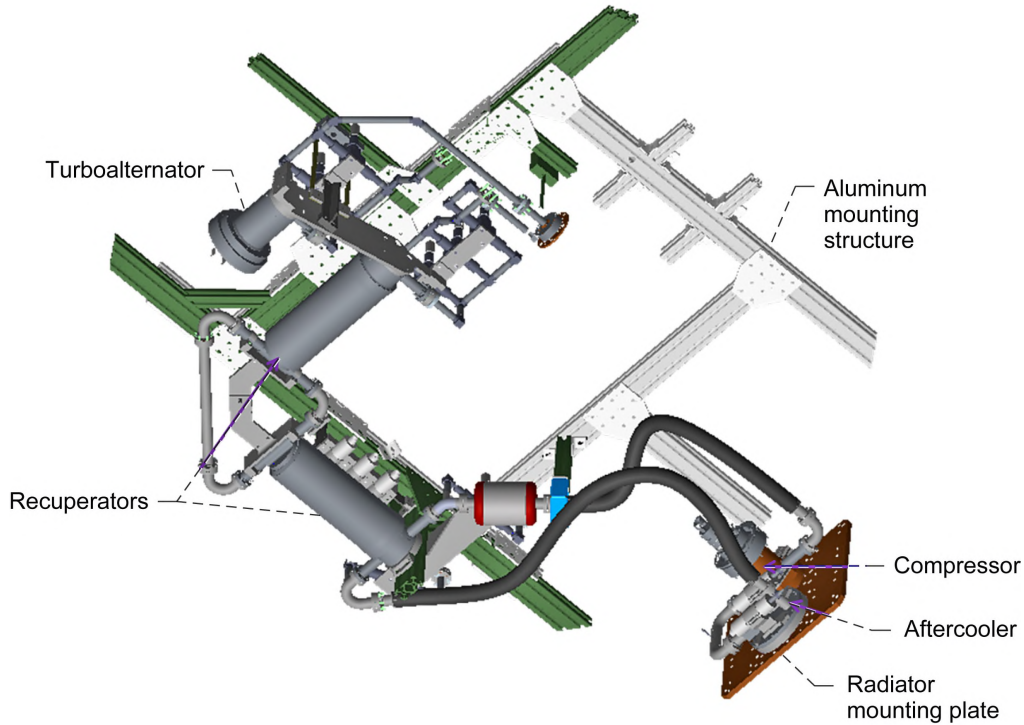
Three-dimensional model of the reverse-turbo-Brayton-cycle (RTBC) cryocooler assembled into the aluminum channel structure.
